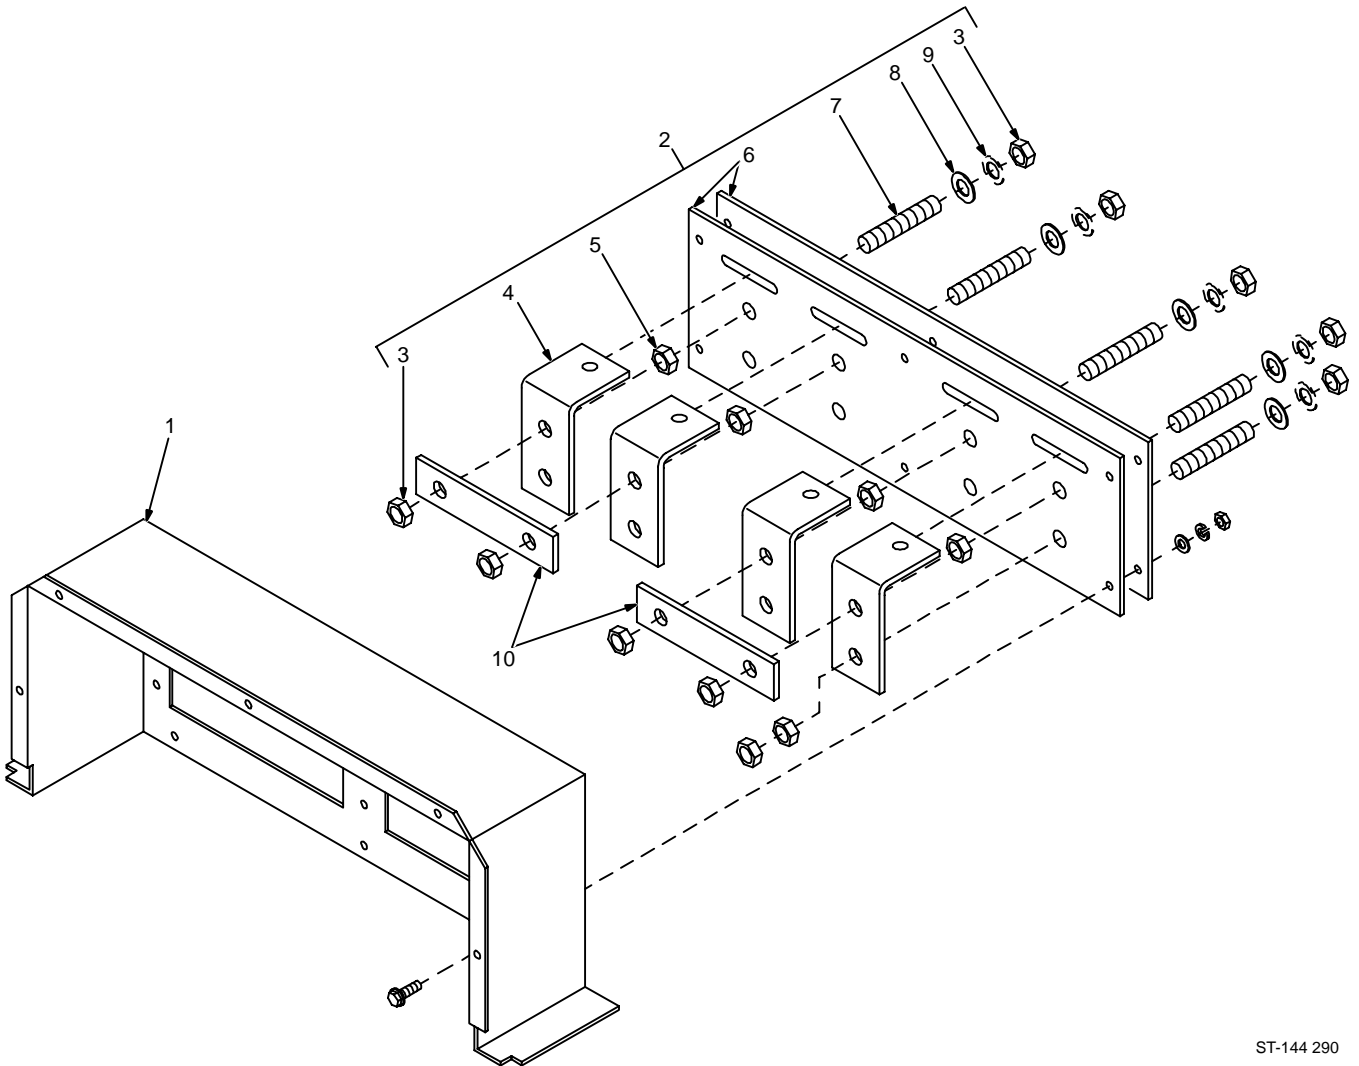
Panel, Rear w/Components (1500 Model Illustrated)
